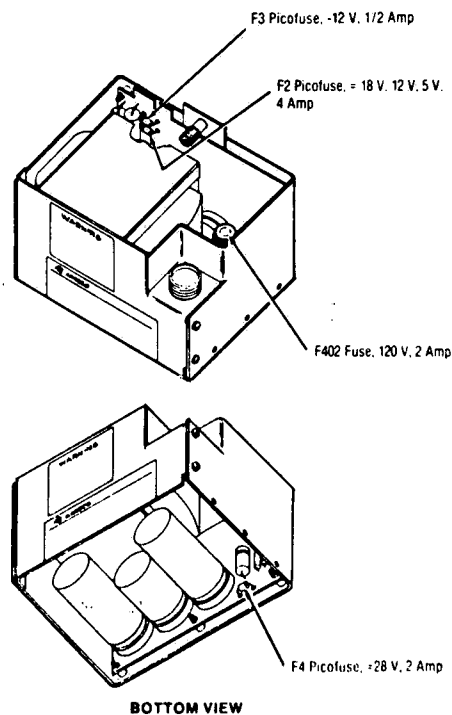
POWER SUPPLY FUSE LOCATIONS.
